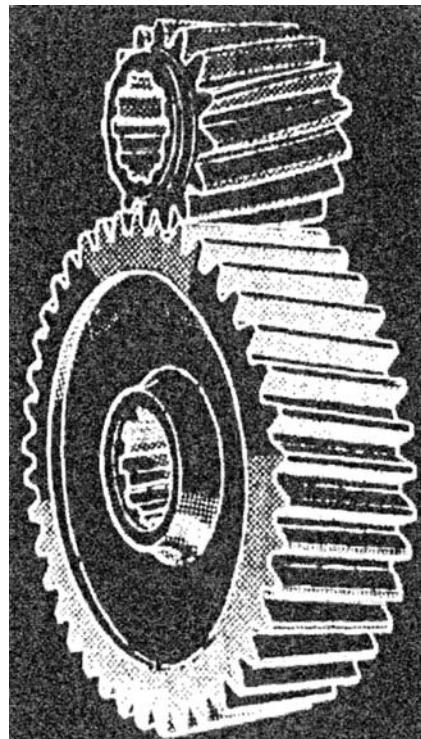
Helical gear. (Courtesy of Lubrizol Corp.)
